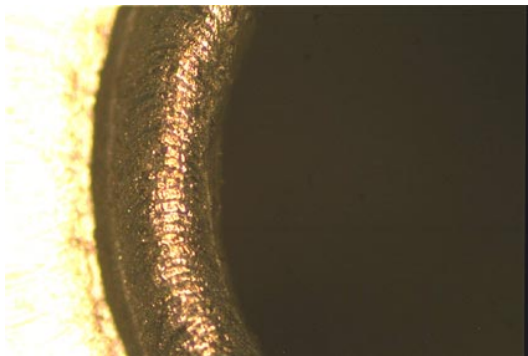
High quality welding seam between a cooling tube (right side) and the container (left side).
